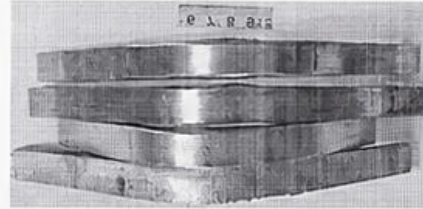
Close up views of the Four guided side bend test samples reveal no cracks more than 3mm existed which is accepted according to ASME IX code.
